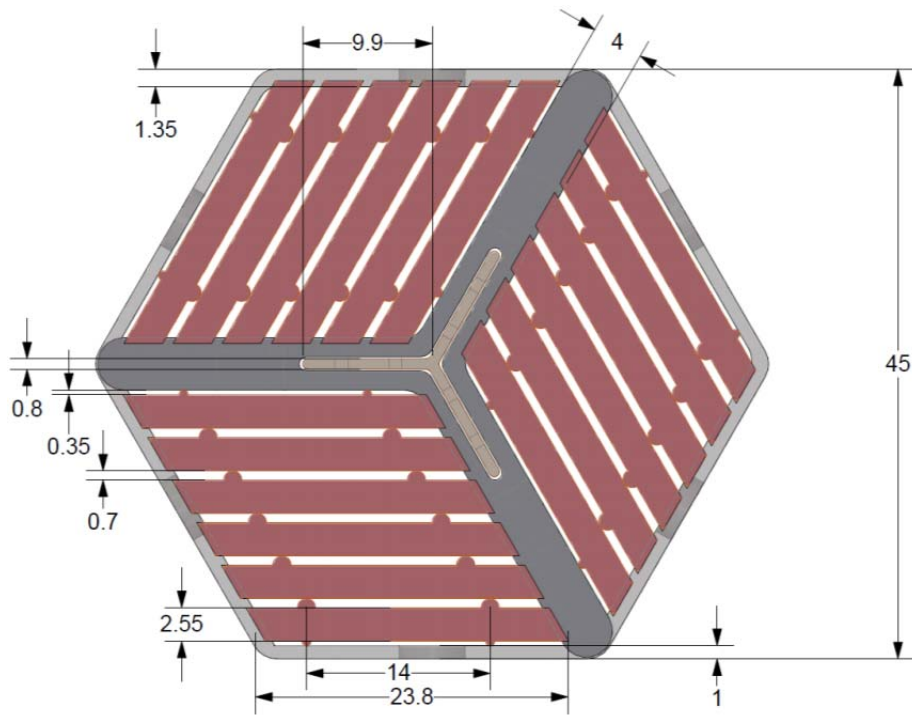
Top view of an AHTR fuel bundle containing 18 fuel elements.
